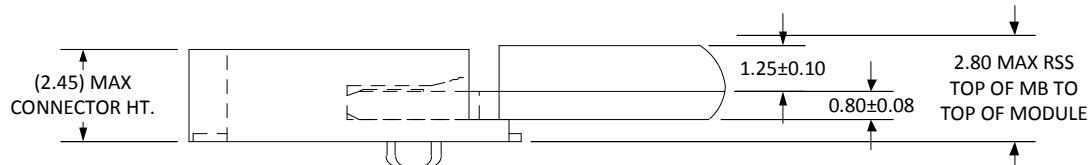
H2.5-S2 - Stack-up Top Mount Single-sided Module for 1.35 Maximum Top-side Component Height and with Higher Clearance above MB
